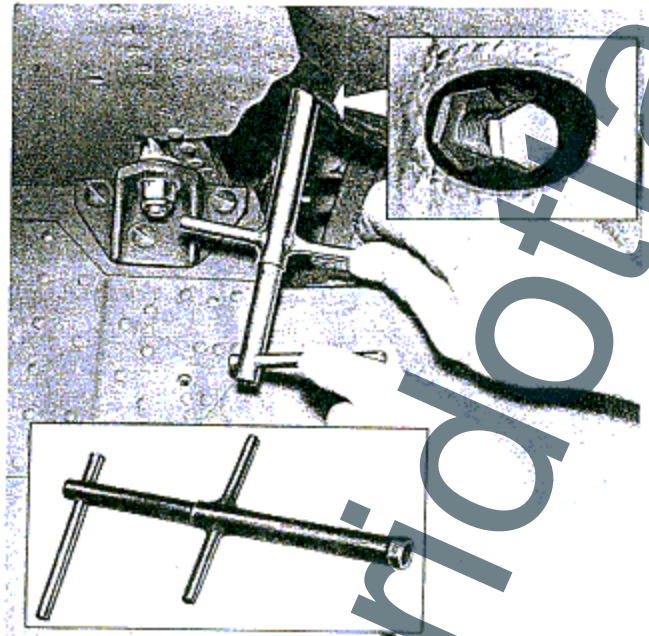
Elevator Trim Tab Control Wrench, P-20233
